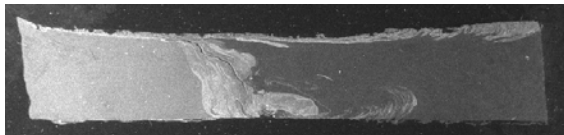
(b): Macrograph of weld produced at 1200 rpm and 150 mm/min
